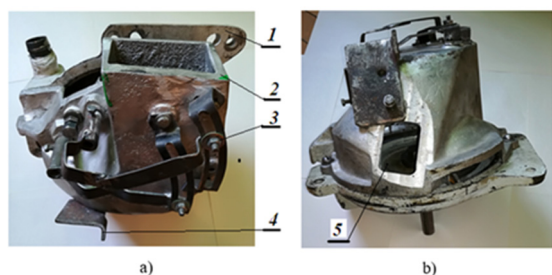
View of the landing gear assembled (the landing disc is not installed; the bottom cover is open): a) side view; b) bottom view: 1-fastener housing; 2-fastener cover; 3-gear adjustment mechanism; 4-cover of the hole for removing hardware; 5-hole for removing hardware.
